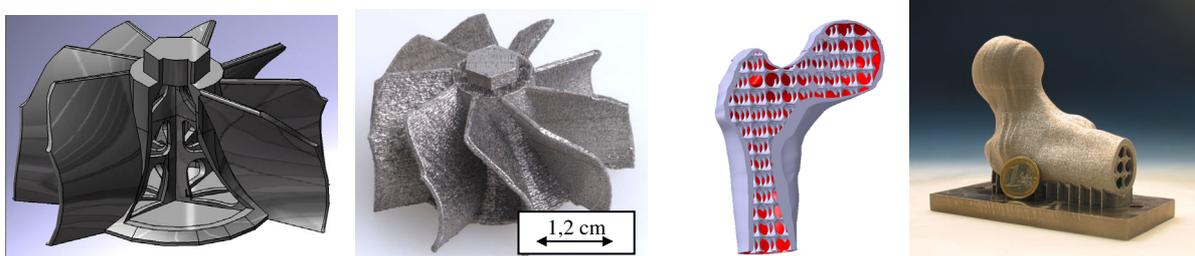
CAD model and Laser Melting part out of Inconel 718 (left), CAD model and implant with internal structure (right)
